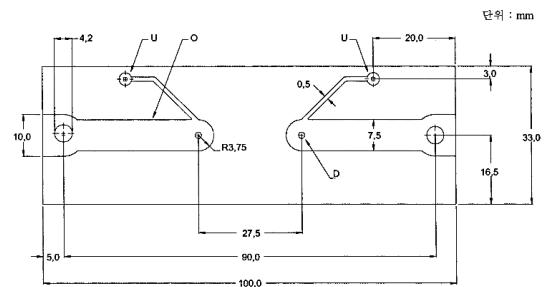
IEC 60127-2 Cartridge fuse Test PCB
